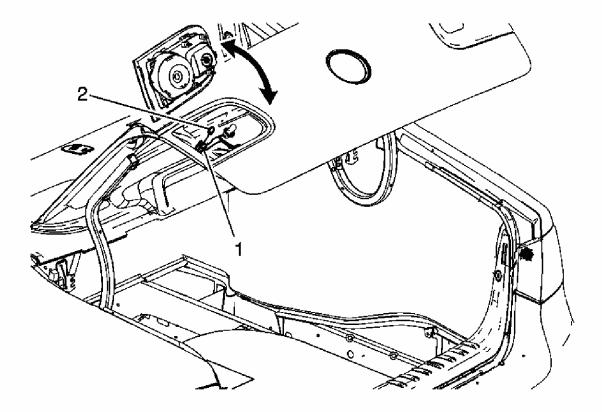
REmoving/Installing Rear Turn Signal Lamp Bulb Courtesy of GENERAL MOTORS CORP.
